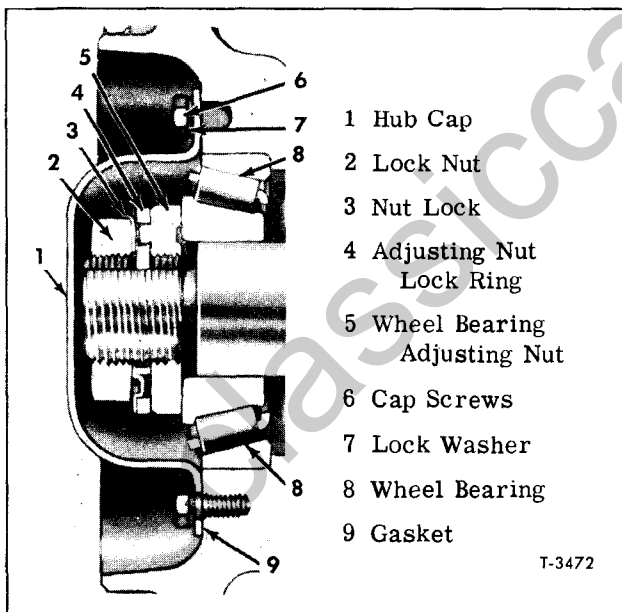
Front Wheel Bearing Adjustment Components (FE900 Axle)
